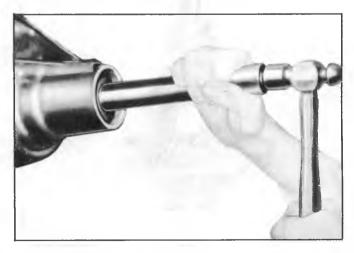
B-Drive Pinion Front Bearing Cup Installation
